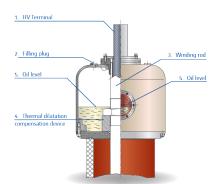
H4 head type (Bottom connection 245 kV 2500 A to 420 kV - 2000 A)
